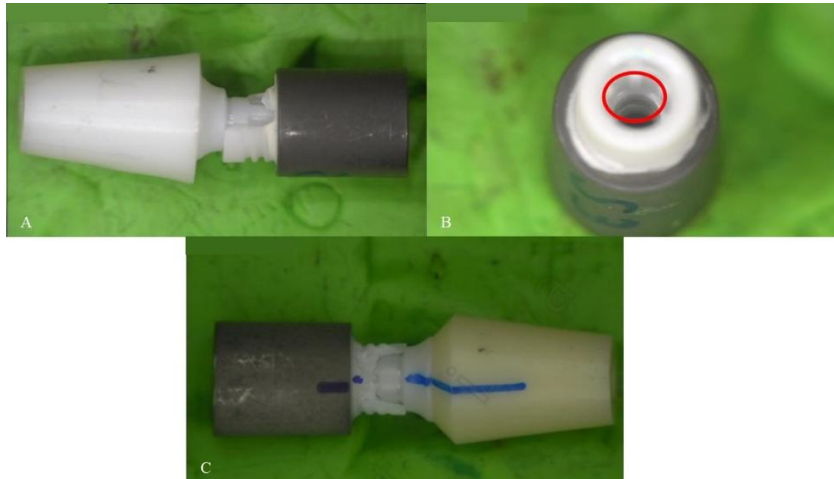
Failures modes. (A) V-shaped fracture at the pressure side; (B) crack in inner thread; and (C) V-shaped crack in implant shoulder on compression side.
